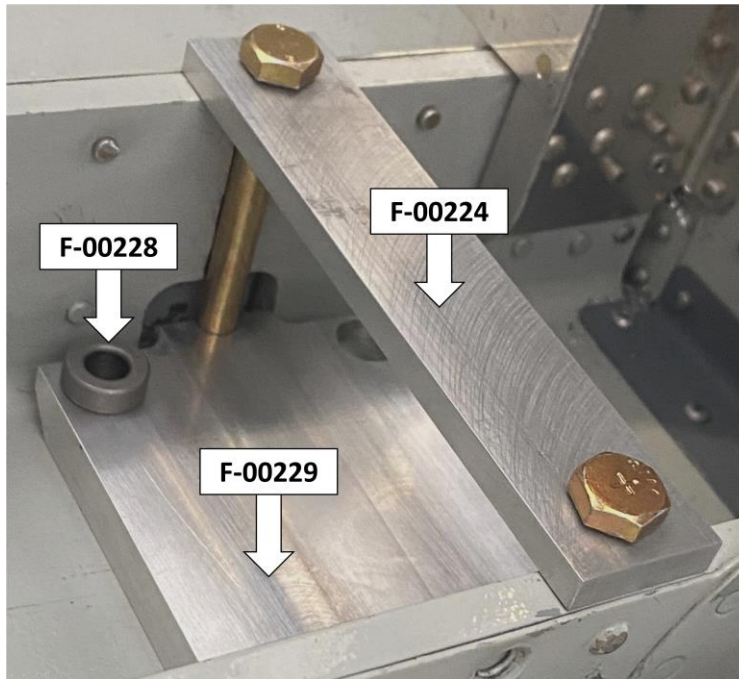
INSERTION OF F-00228 DRILL BUSHING, F-00229 DRILL GUIDE, AN5-50A BOLTS, AND F-00224 REINFORCEMENT PLATE
